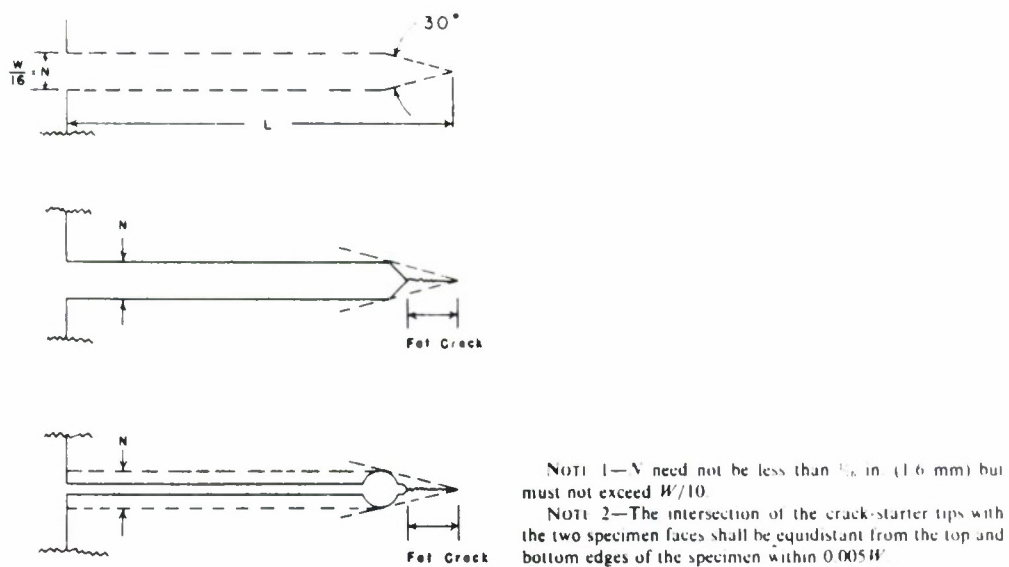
Envelope for Crack-Starters Notches and Examples of Notches Extended with Fatigue Cracks
